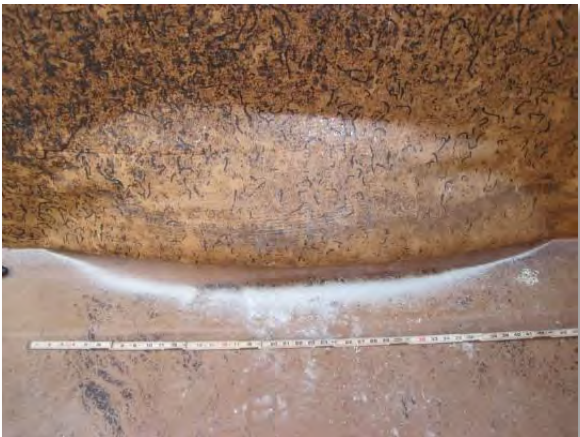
Approx. 48-inch-long by 18-inch-wide blister at east end of south pass on outside east wall of CCC.
